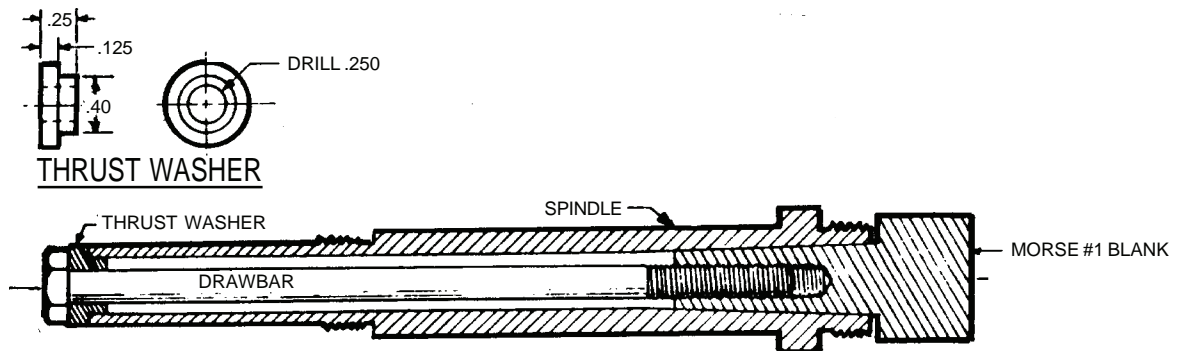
Cross-section of headstock spindle showing Morse blank, drawbar and thrust washer in position.
